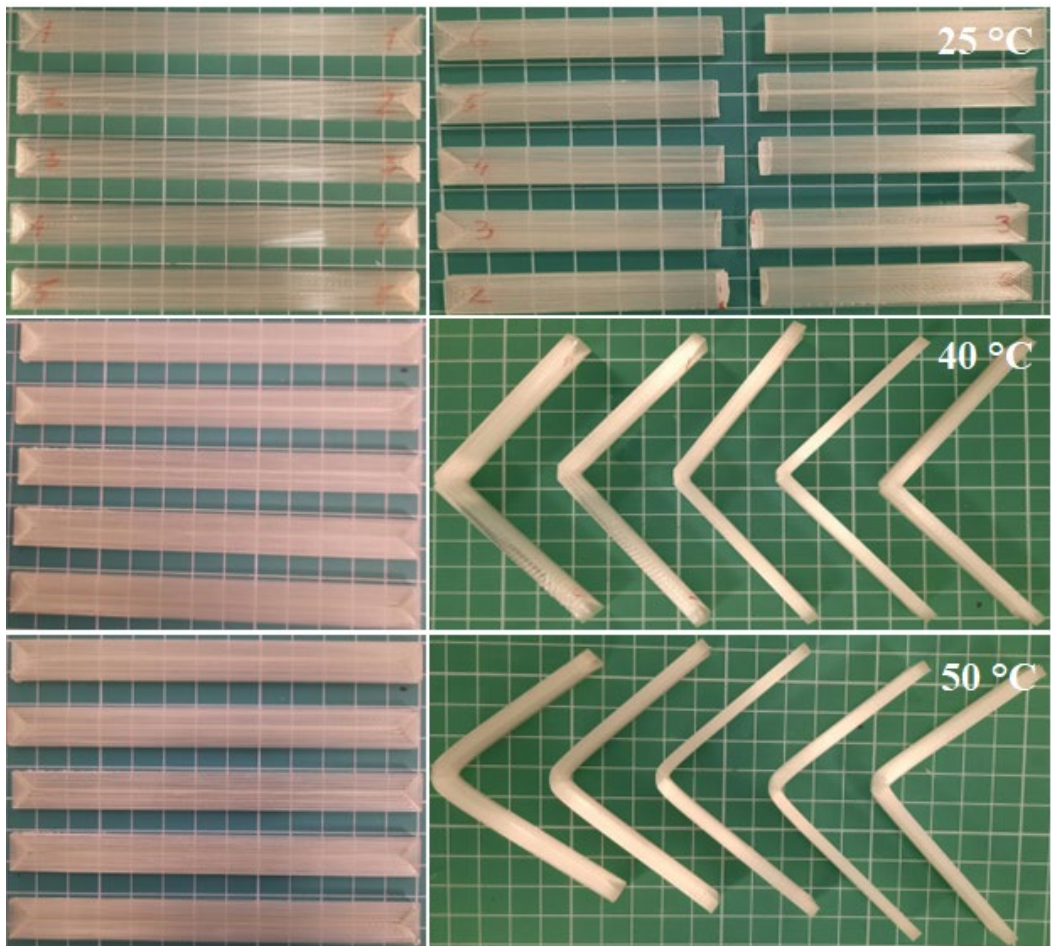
3D printed PLA samples before and after mechanical flexural testing
